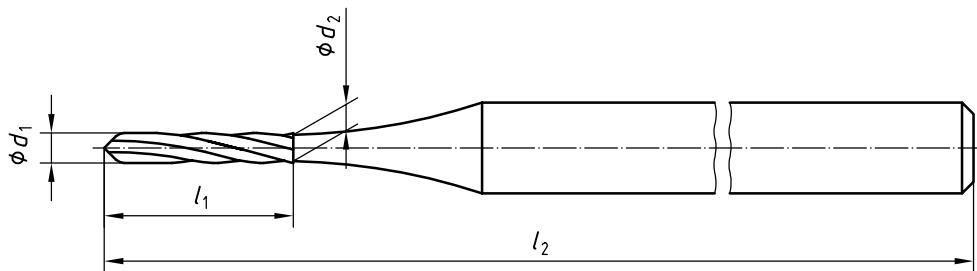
Torpedo, cylindrical, head length 5 mm, carbide finishing burs
